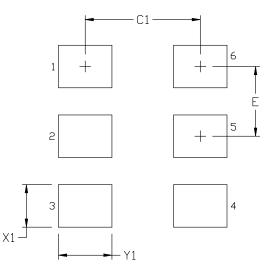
Si545 (5×7 mm) PCB Land Pattern
